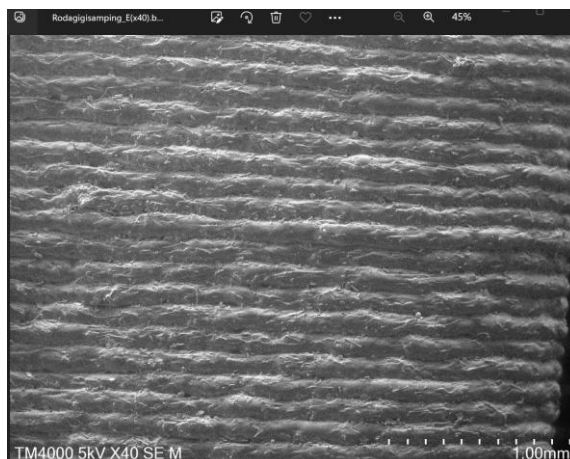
Photo of the tooth surface after the torsion test was carried out under conditions with oil lubrication on Onyx+10 % Carbon Fiber material
